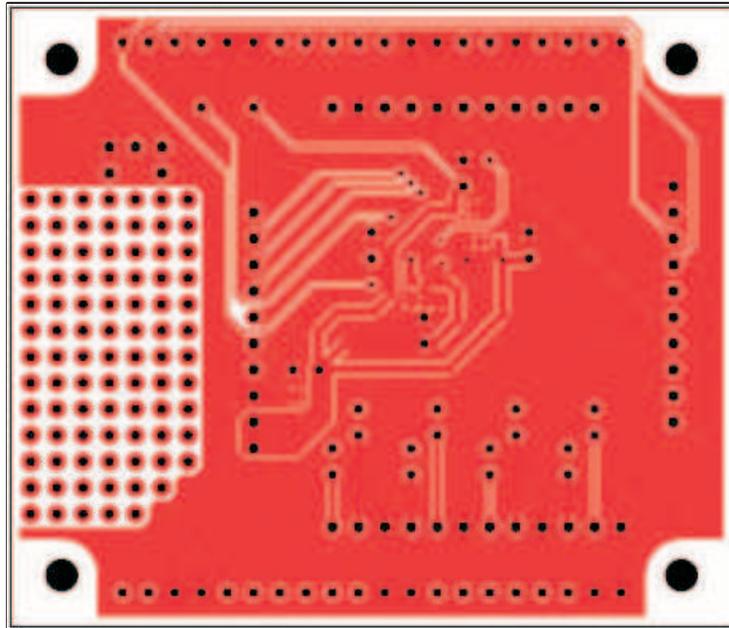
DEM-PCM1780/81/82 Board Layout—Bottom View
